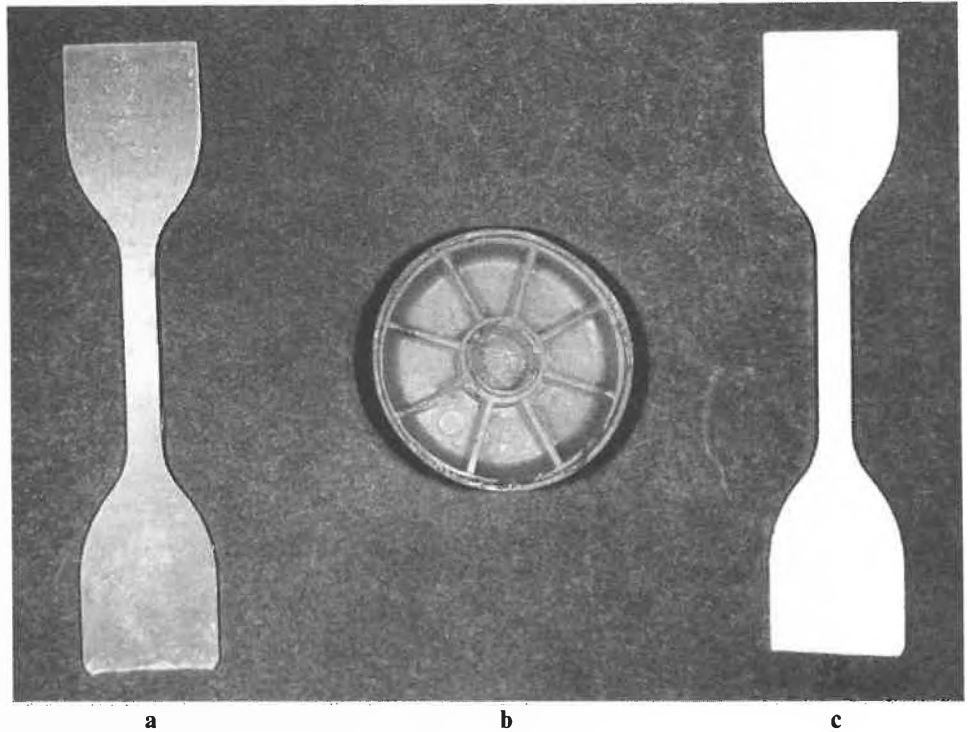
Photographs of injection-mouldings: (a) opaque tensile test-piece, (b) circular moulding, (c) clear tensile test-piece.
